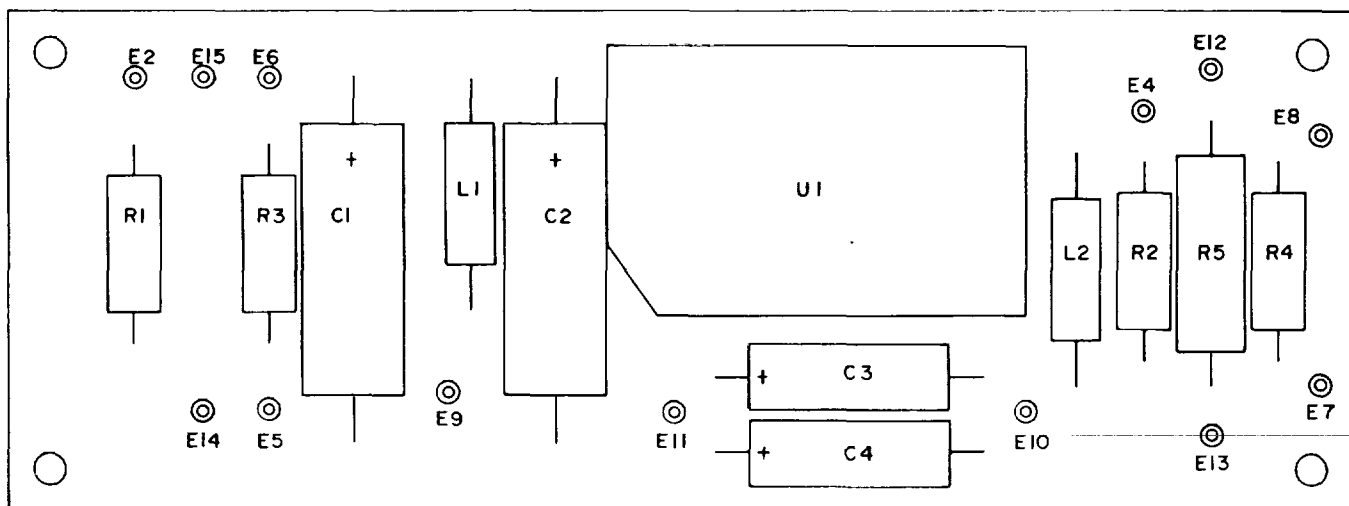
Meter Card Circuit Card Assembly, 1A5A6 Parts Location Diagram
